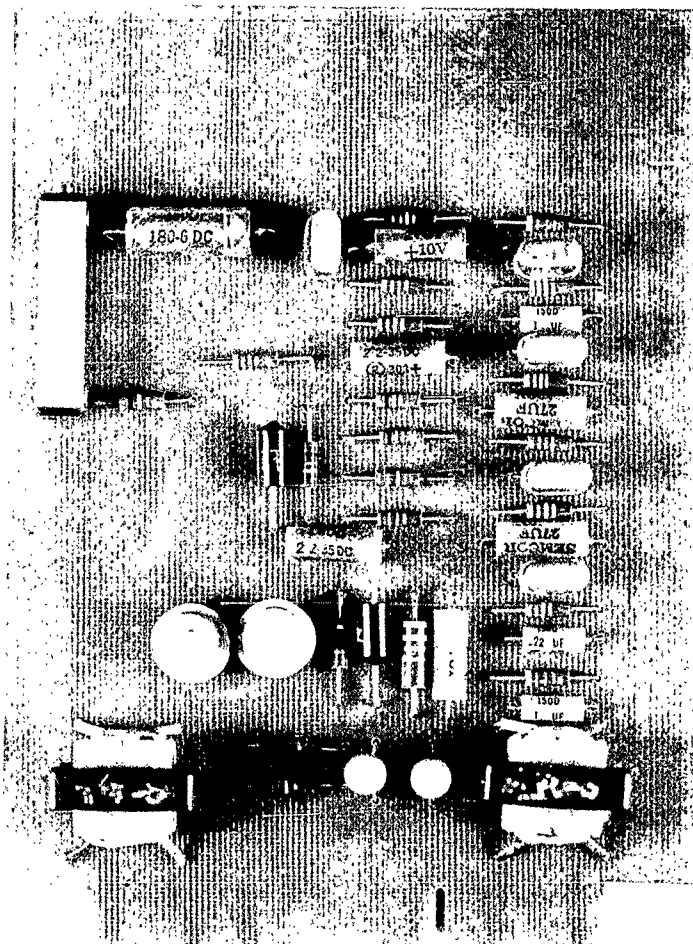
COMPLETED PRINTED CIRCUIT BOARD
